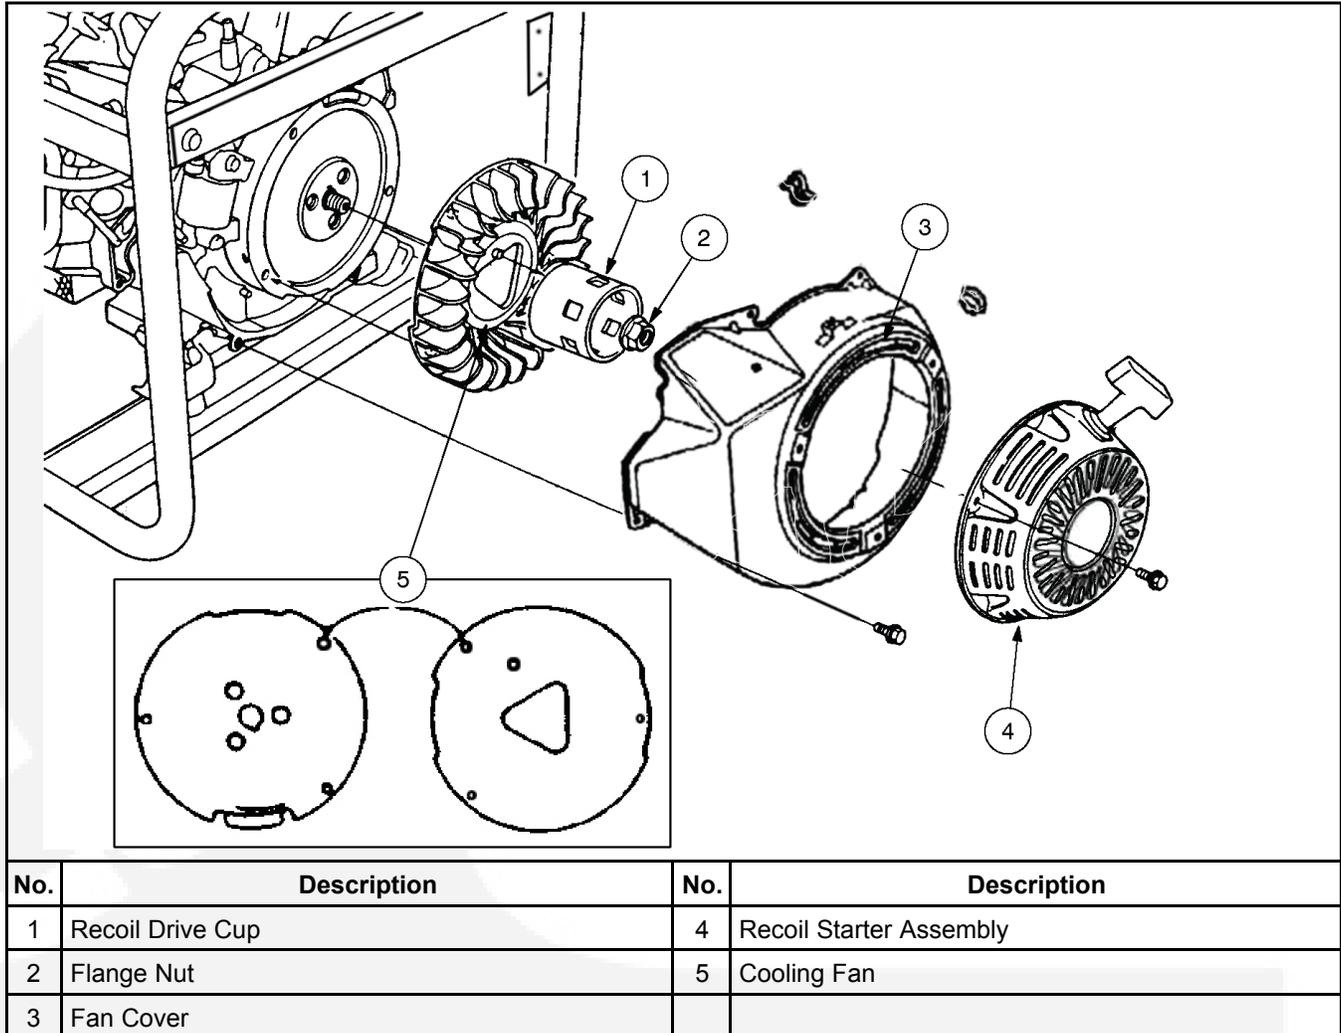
RECOIL STARTER / FAN COVER ASSEMBLY
